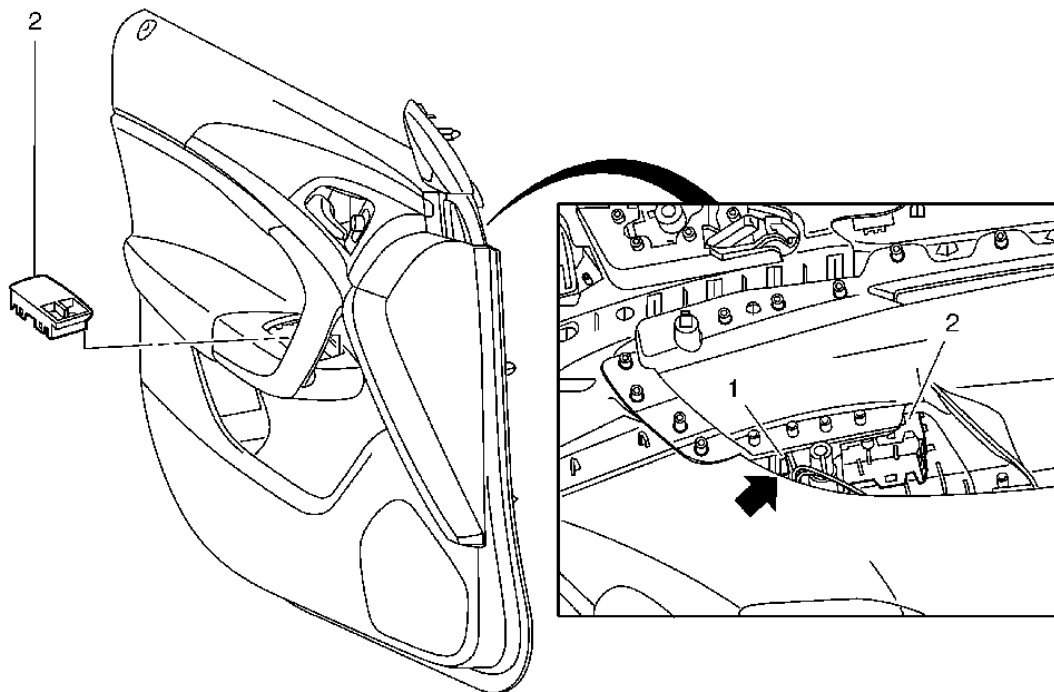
Front Side Door Window Switch Bezel & Retainer
